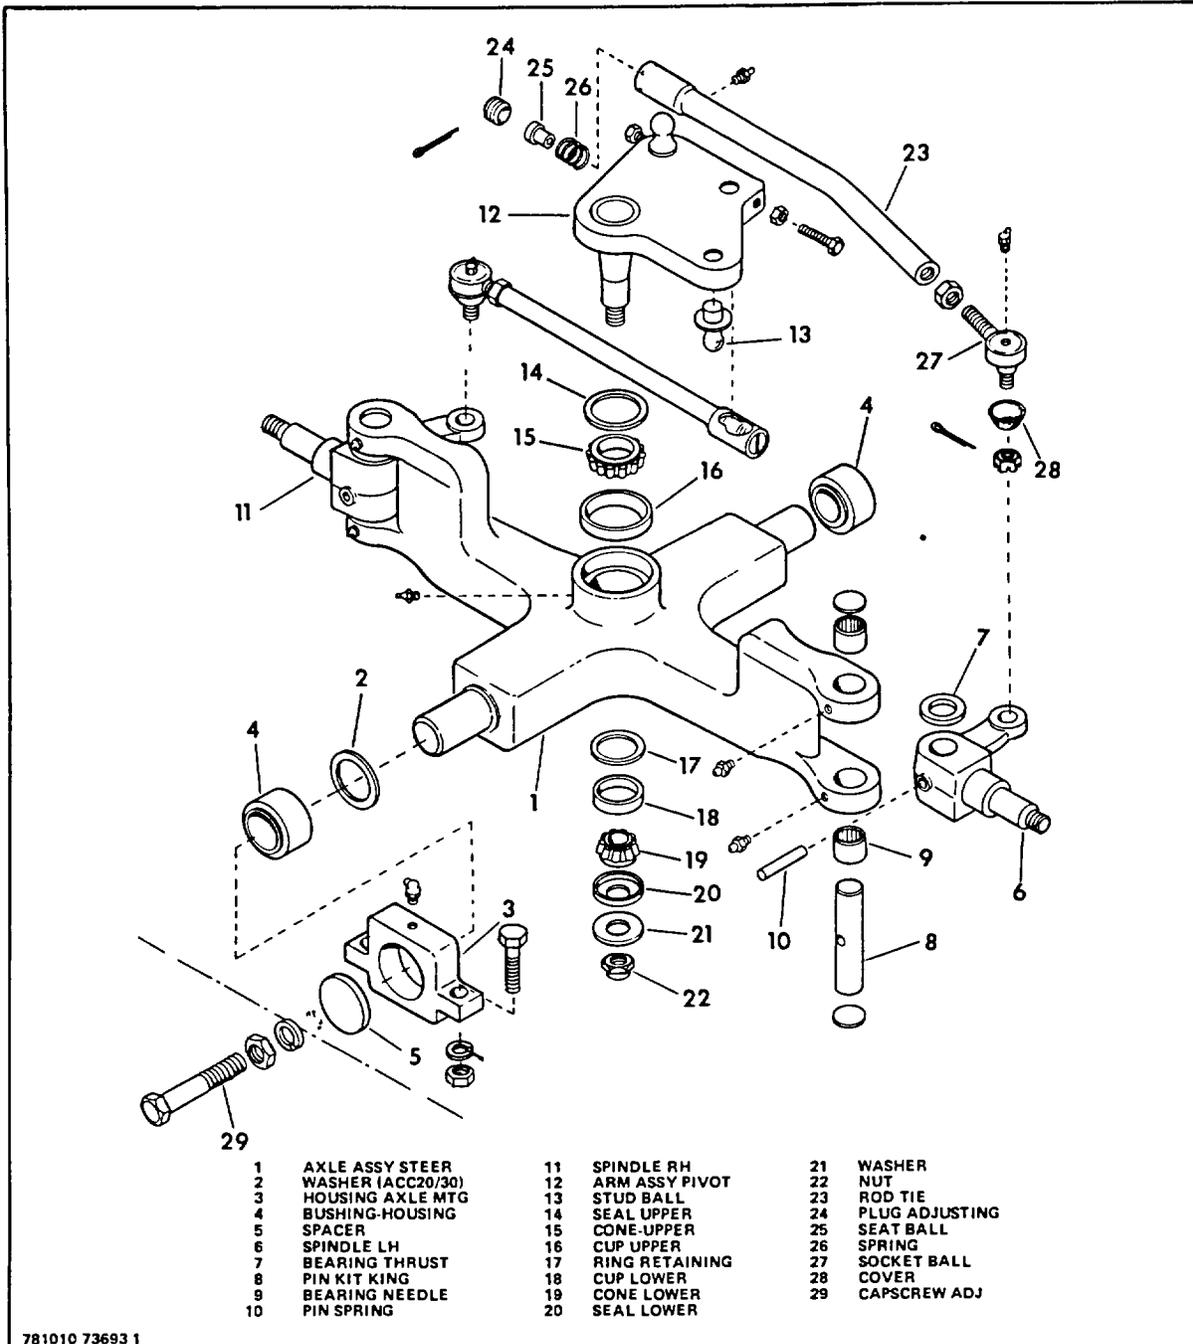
Steer Axle Assembly (ACC/ACP 20-30)
